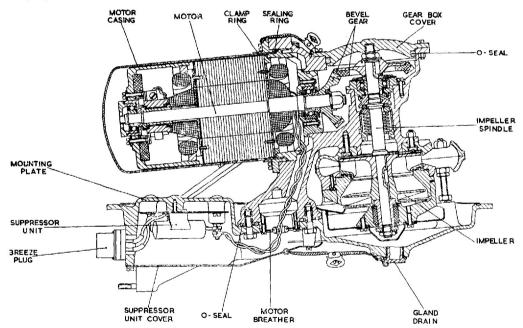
Sectional view of SPE.3506 fuel booster pump
